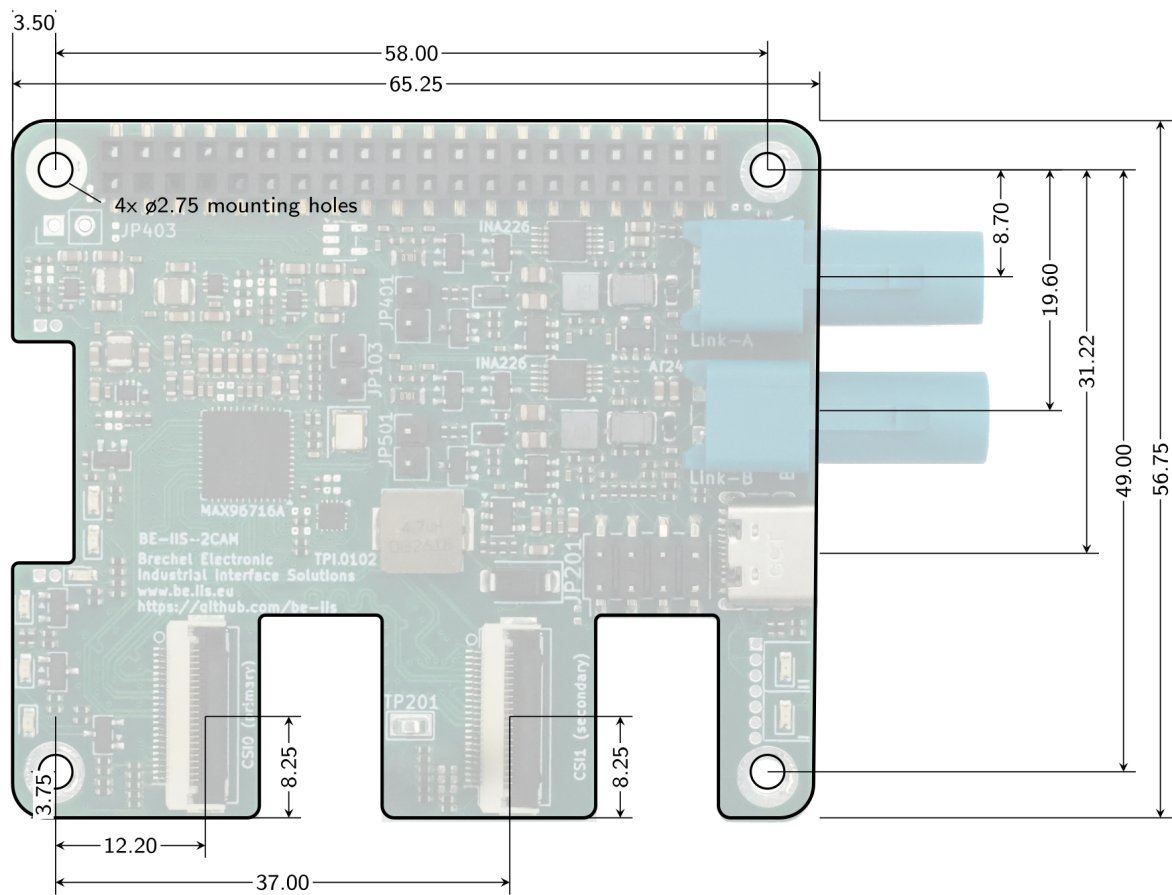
BE-IIS-GMSL2-2CAM – mechanical dimensions and connector reference positions
